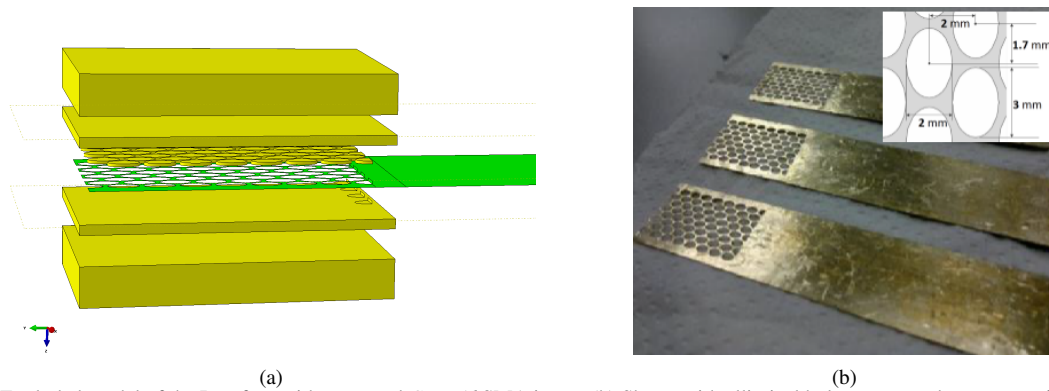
(a) Exploded model of the Interface with patterned $CuZnAl$ SMA insert. (b) Sheets with elliptical hole pattern and geometry of the pattern.
